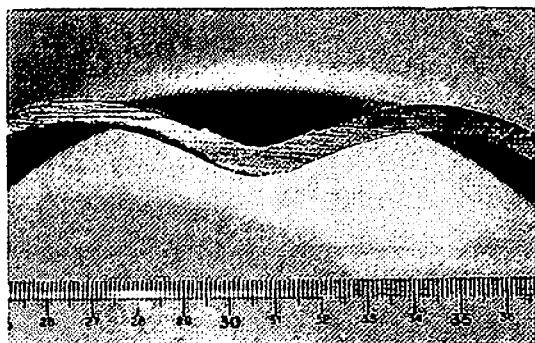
A photograph of a cross section of the steel pipe after welding test
